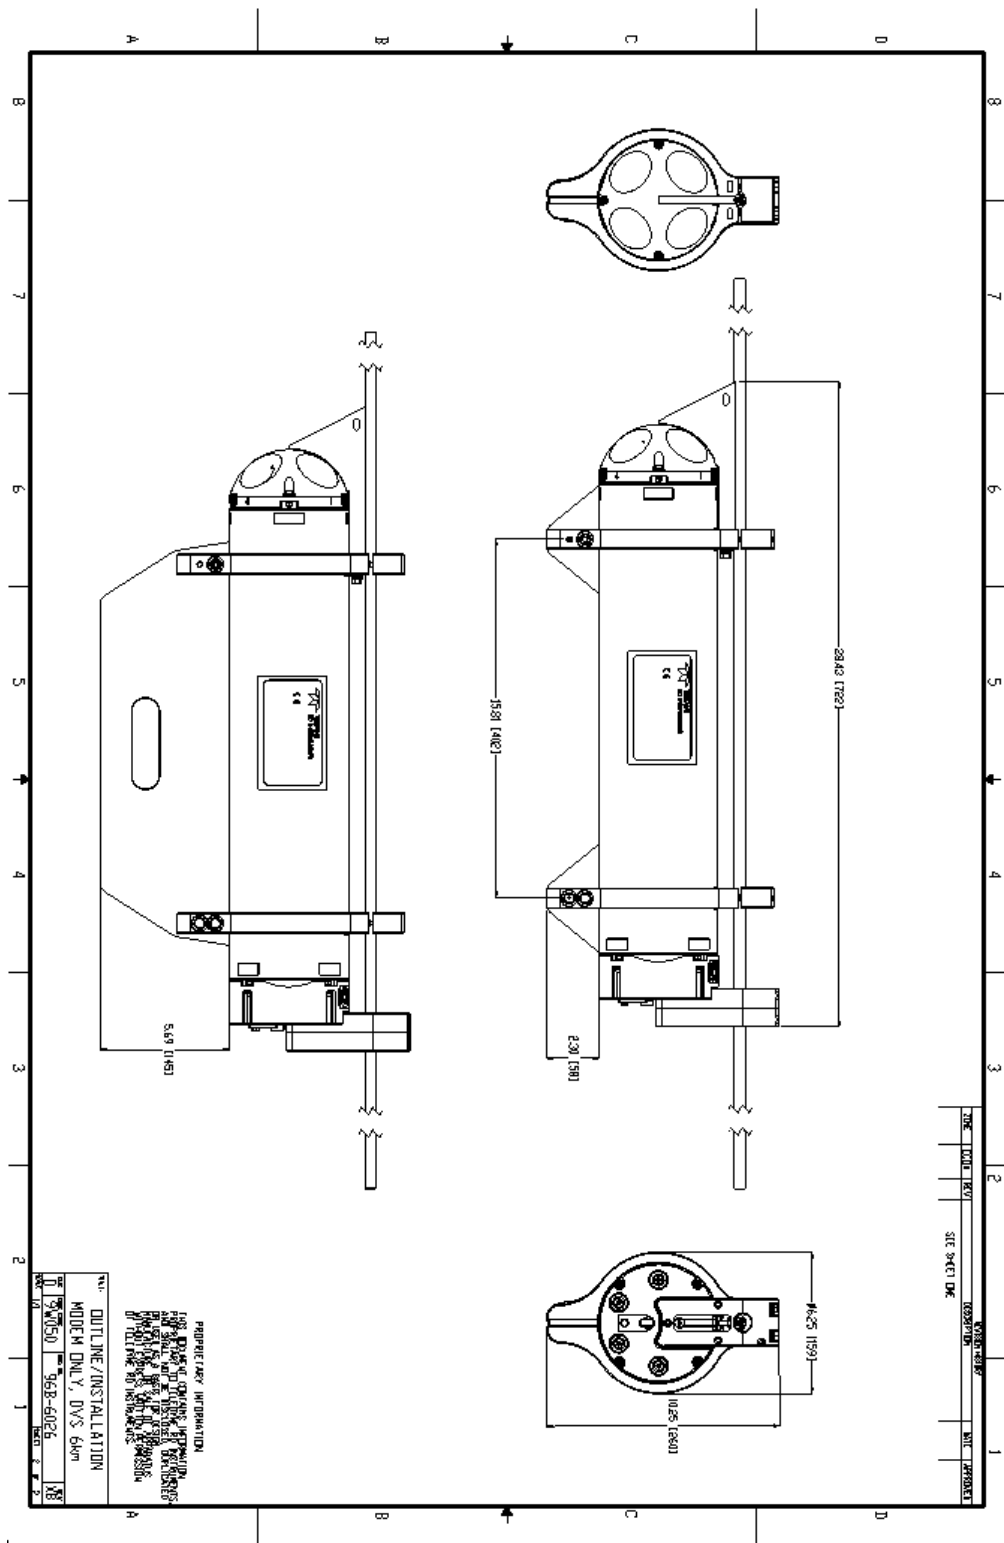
Outline Installation Drawing 96B-6026 Sheet 2
